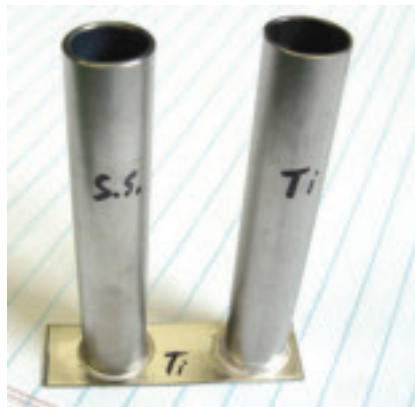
Stainless steel and titanium tubes brazed to titanium plate in vacuum using BAg-8a filler metal in the form of 1/16-in. wire ring placed inside the tubes. (Photo courtesy of Dr. Yury Flom, NASA Goddard Space Flight Center.)
